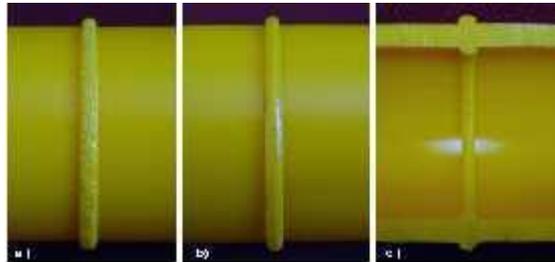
a) Inappropriate welding parameters b) Appropriate welding parameters c) Appropriate welding parameters and pipe internal surface appearance [18]
